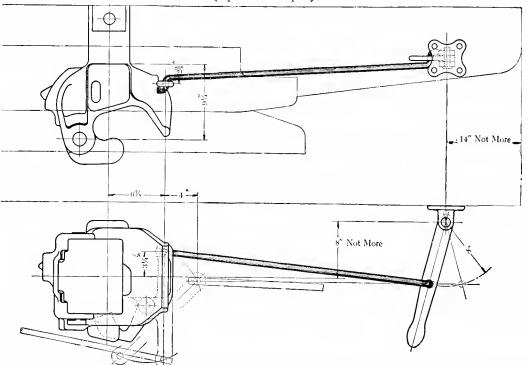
Recommended Uncoupling Arrangement for Simplex Passenger Coupler. American Steel Foundries.
